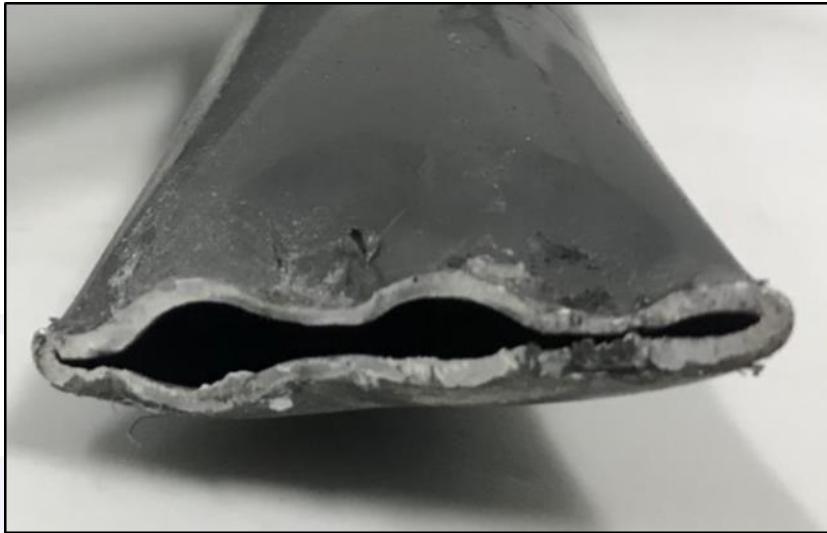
Drive shaft with a “fish mouth” fracture, typical of failure due to overload.
